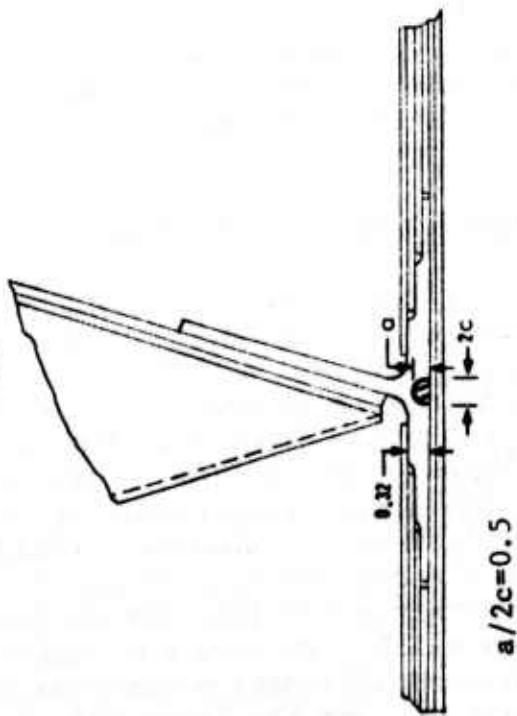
633-RW002 Wing Box Preliminary Fracture Analysis
